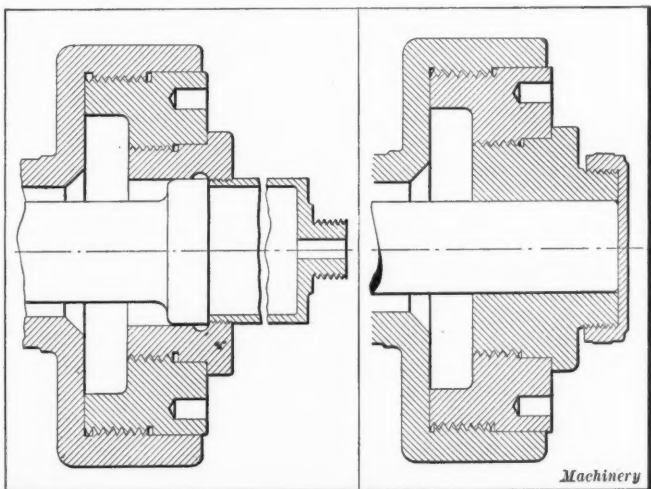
Adapter Ring and Push-out Rod Fig. 40. Internally Threaded Work locked by Push-out Rod
